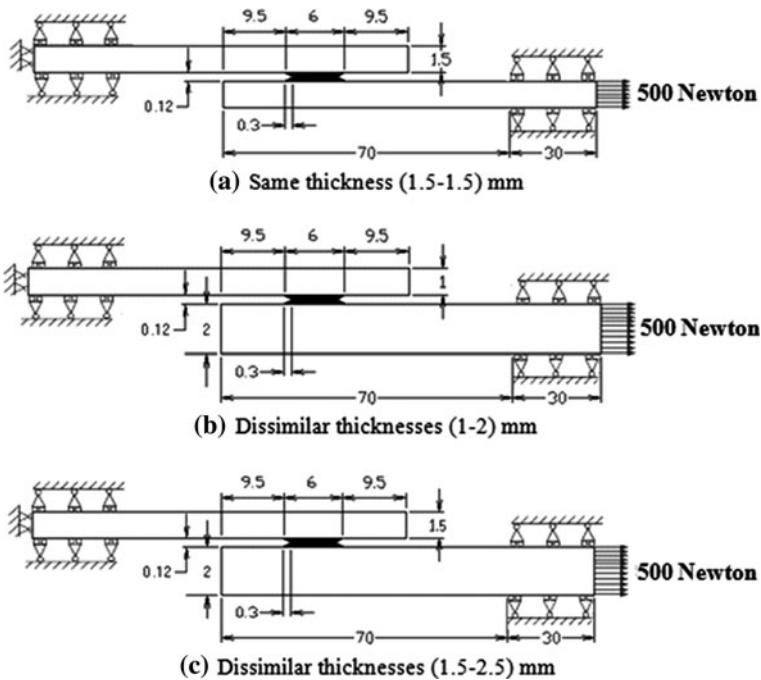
Configuration, dimensions and loading conditions of the dissimilar thicknesses spot welded joints
